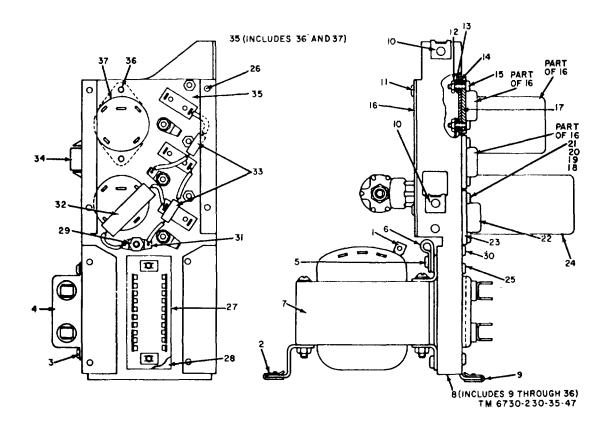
Amplifier cover assembly, exploded view (AS-25A1).
